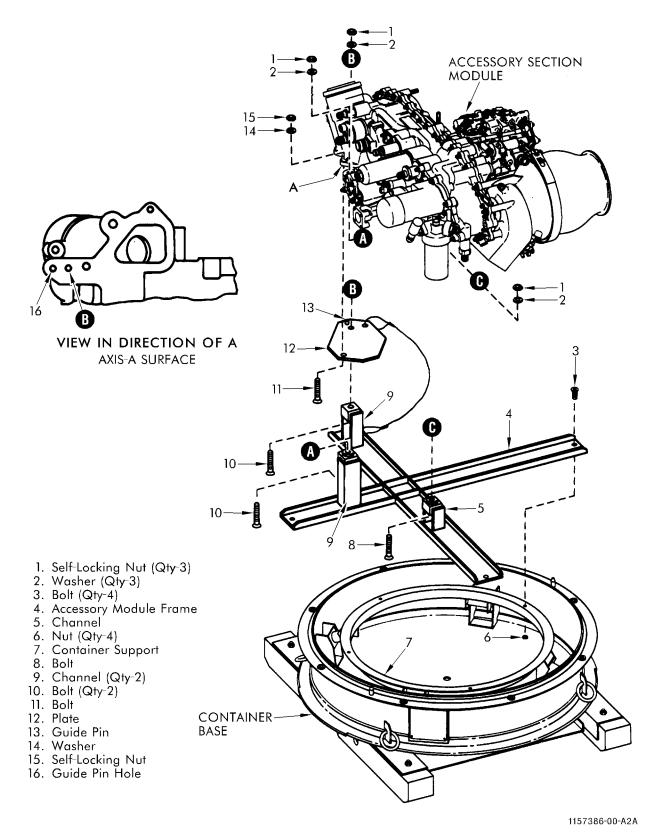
Accessory Section Module Shipping and Storage Container 21C7301G01; Removal and Installation of Module
